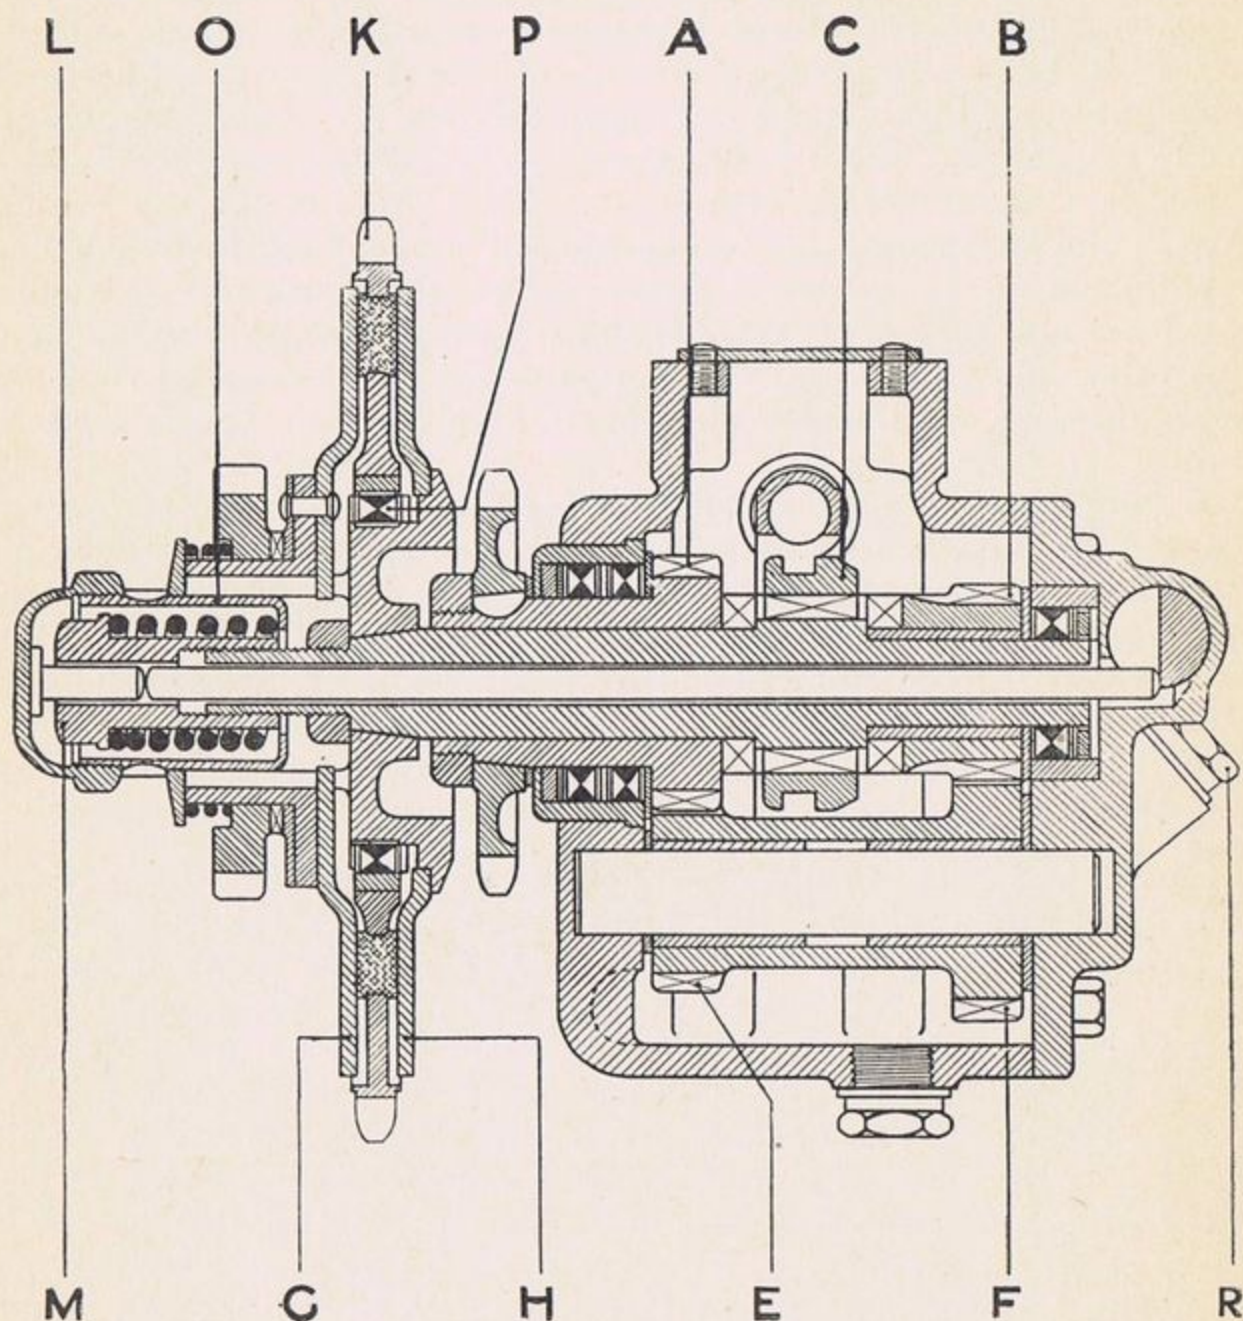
ENFIELD TWO-SPEED GEAR-BOX
